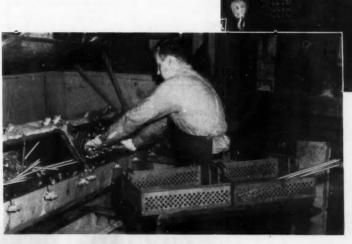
One row of four Roto-Finish barrels in which both steel and aluminum parts are deburred. Operators in background are doing hand loading and unloading of aluminum parts that require care in avoiding impacts.
